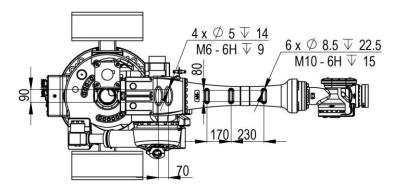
interface dimension drawing of AIR165-2750A manipulator jib
